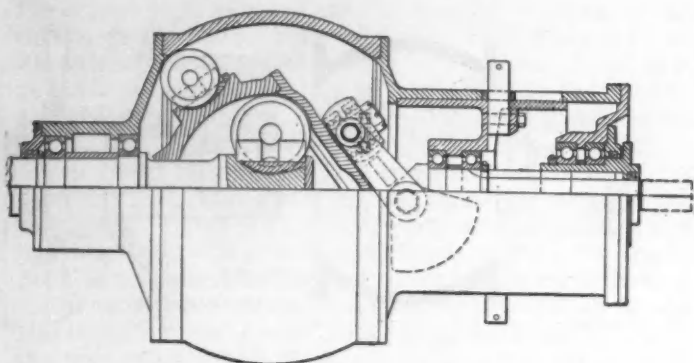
A HEAVY-DUTY FORM OF TRANSMISSION IN WHICH THE UNIVERSAL-JOINT IS NOT USED AS THE CONNECTING MEMBER BETWEEN THE MOTOR AND THE DRIVEN SHAFT
